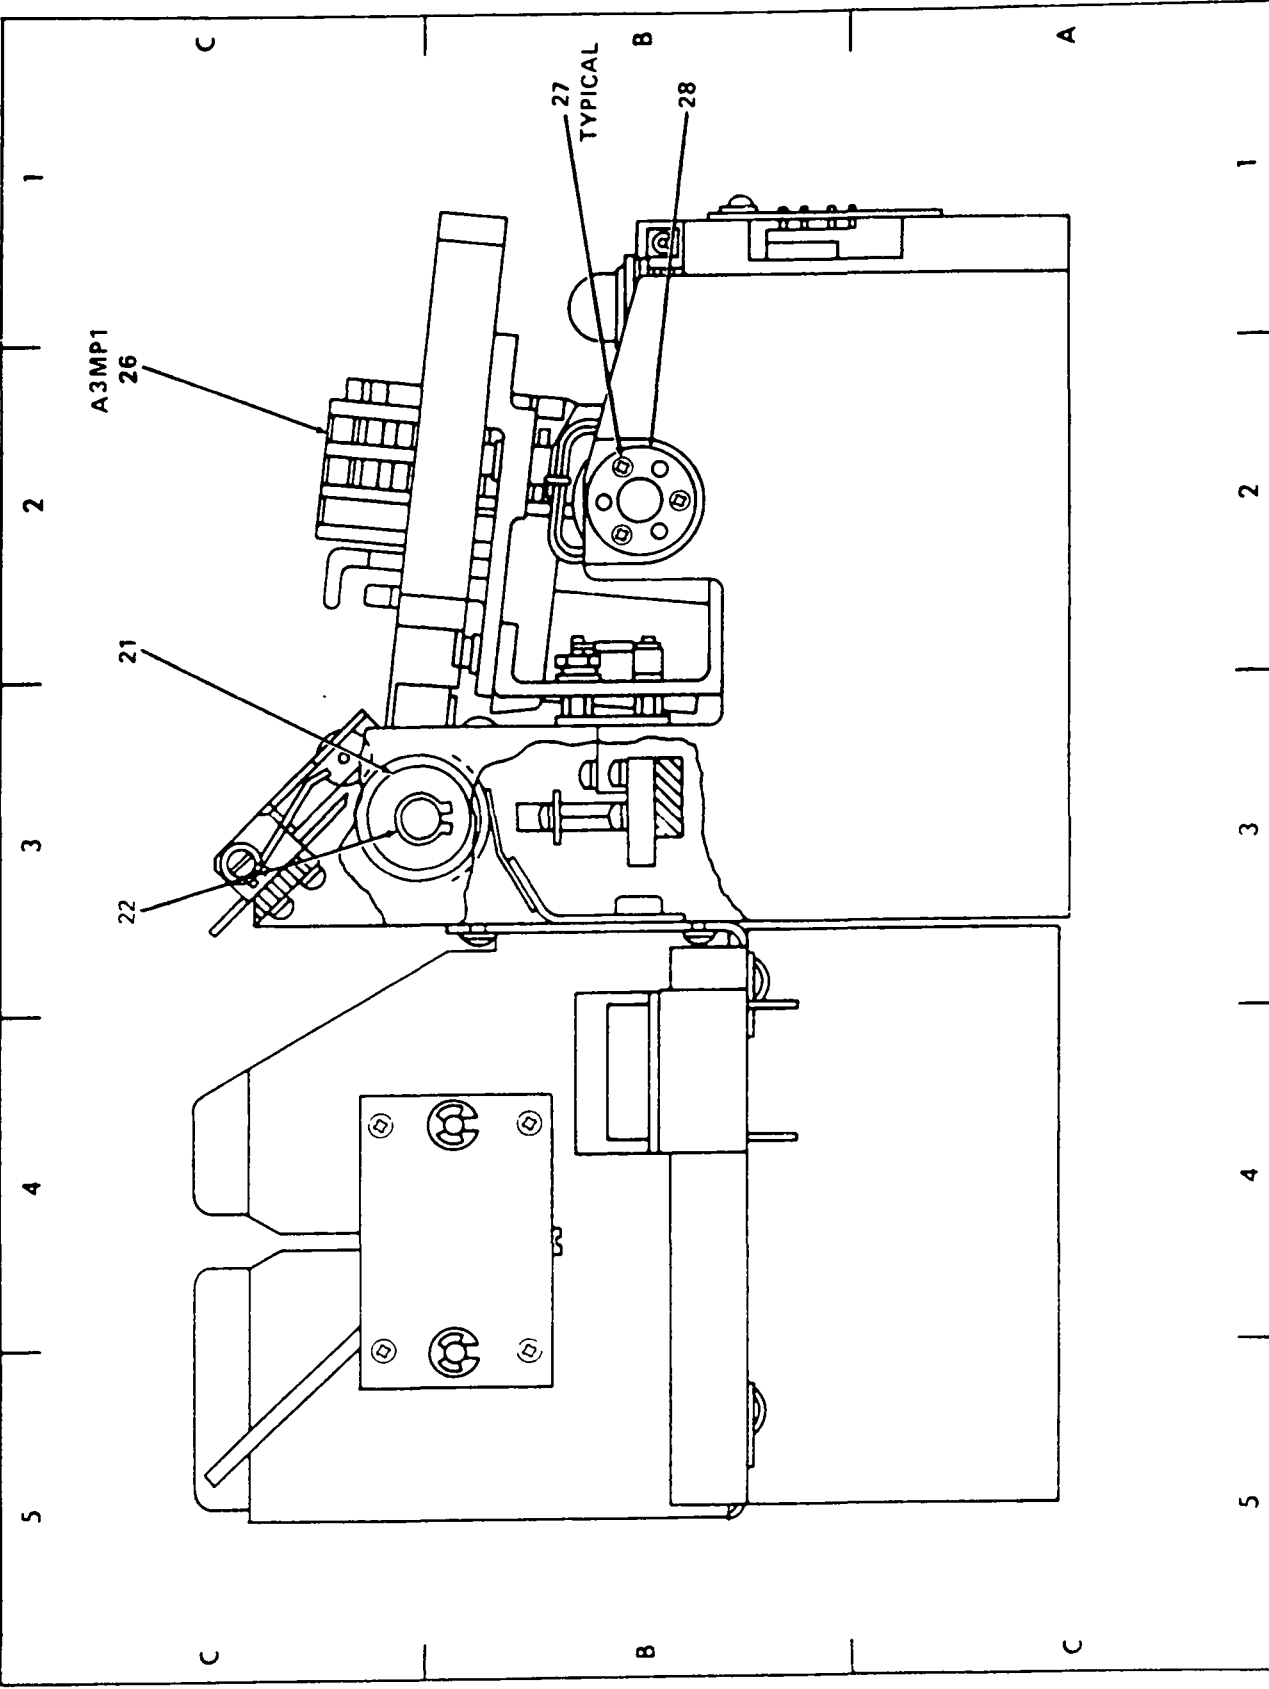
Teleprinter Subassembly (Sheet 5 of 5)
